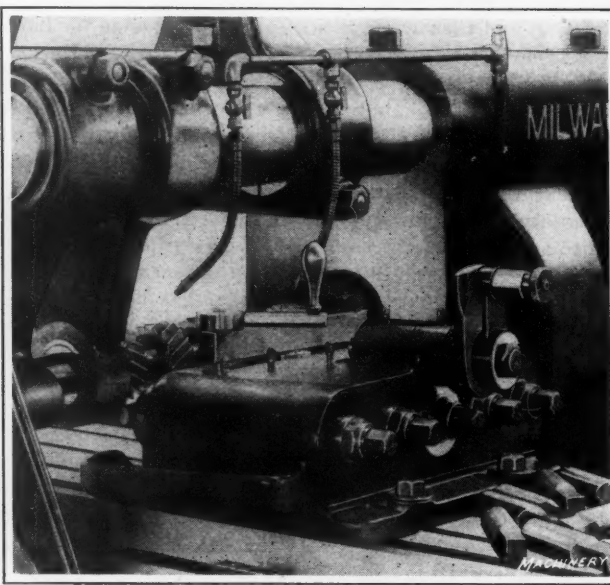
Opposite Side of Work-holding Fixture shown in Fig. 7, showing the Single Crank for indexing the Work and Individual Bolts for operating the Collet Chucks
